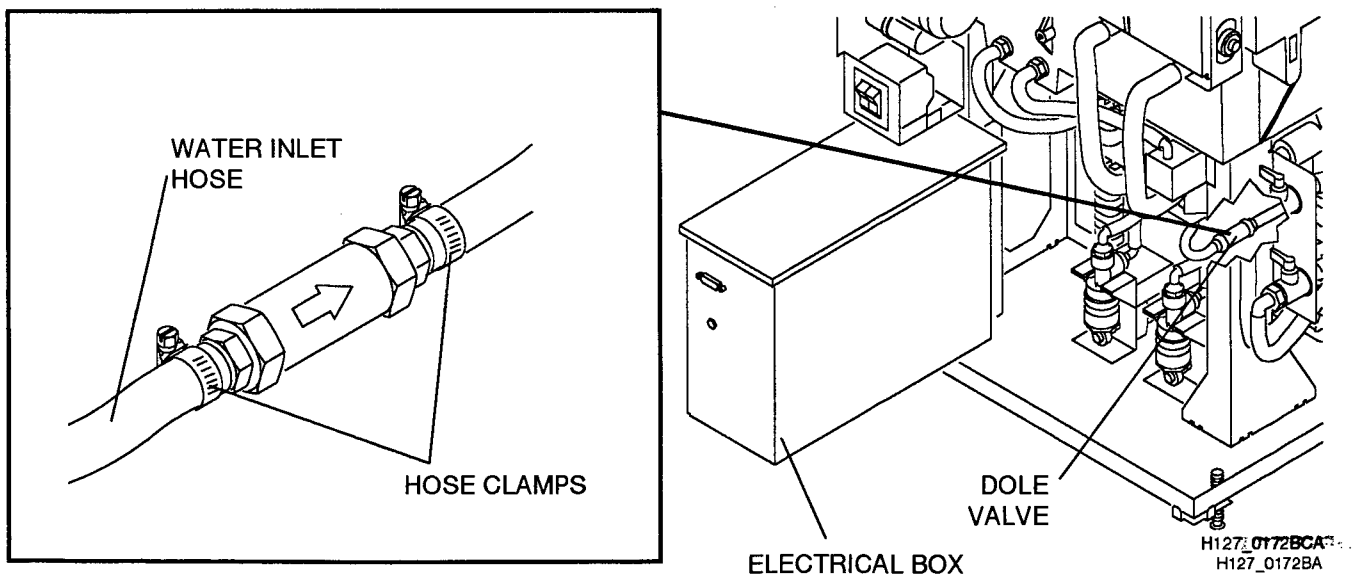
Identifying Parts on the 180 LP PROCESSOR
